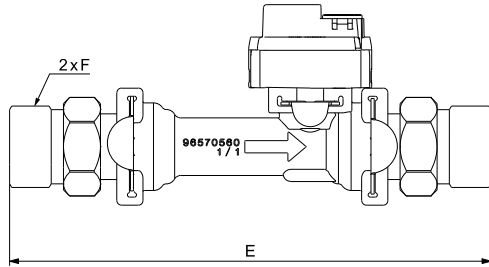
Dimensions, MFS 4-40 l/min, with adapter
